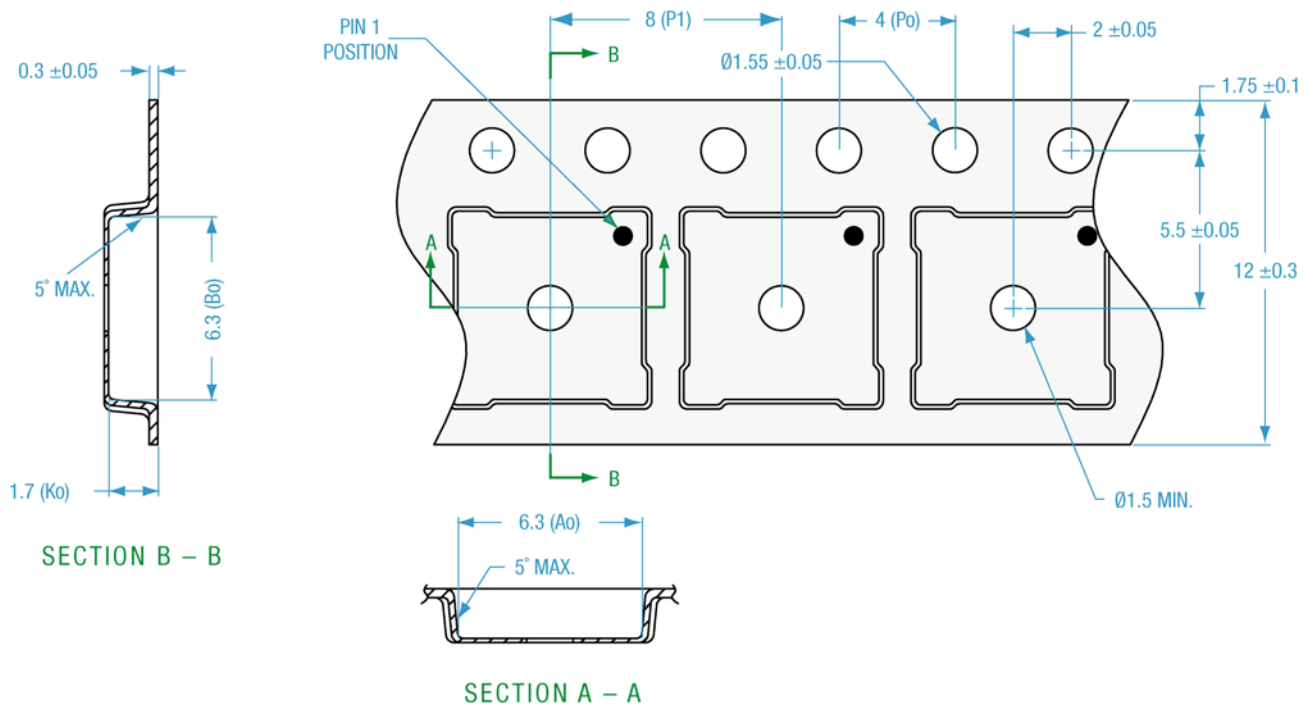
Carrier Tape Overmold MCM/RFLGA – 3.0 x 3.0 mm Body Size
